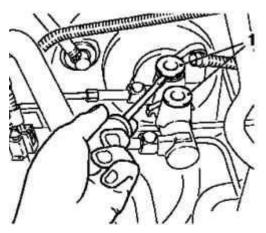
Replacing the seal on the master brake cylinder: 1 - Seal
